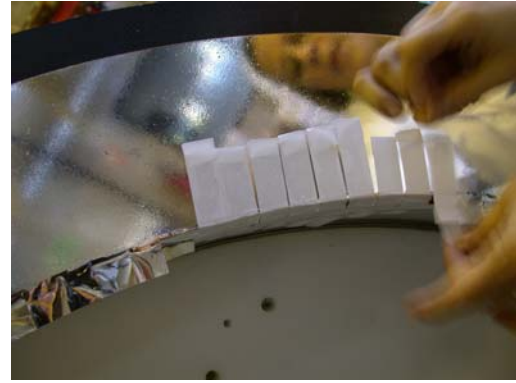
Al-k inner layer placed on the mandrel. Two sheets used to cover the length.
